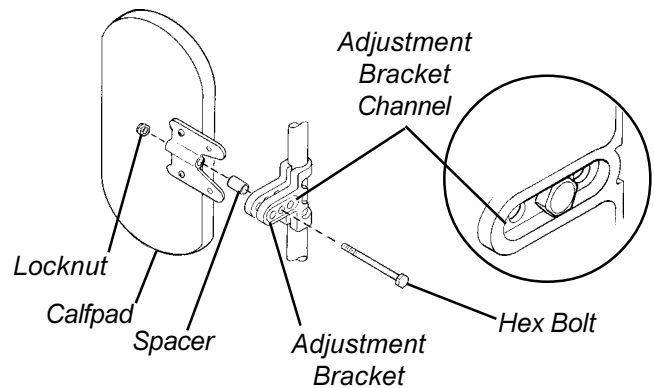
ADJUSTING GENIUS LEGRESTS - CALFPAD HEIGHT/DEPTH
